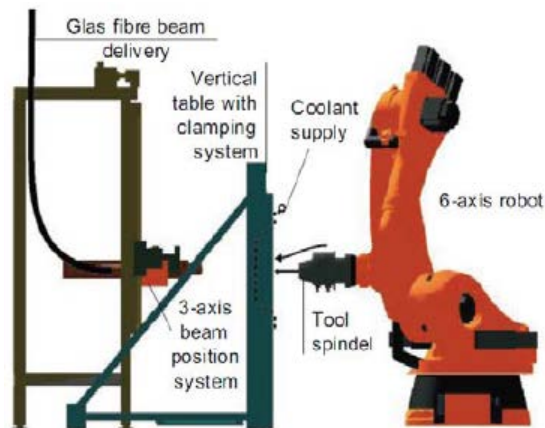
Laser assisted incremental forming system (Duflou et al. 2011)
